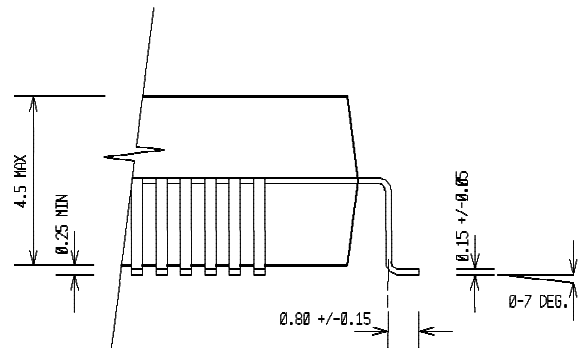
ALDC1-40S-M Pin Close-up View. All length and tolerance dimensions in millimeters.
